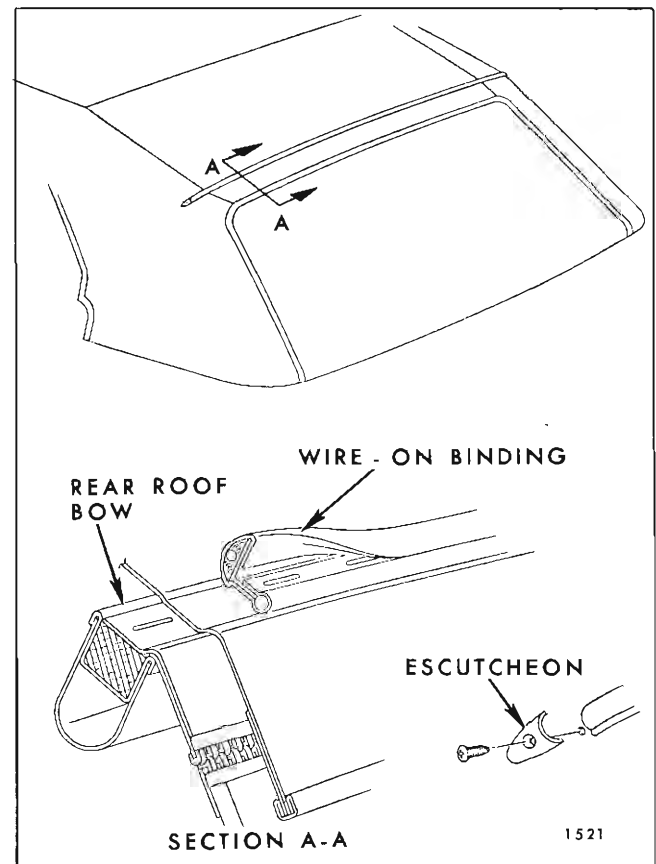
Rear Roof Bow Wire-On Binding
